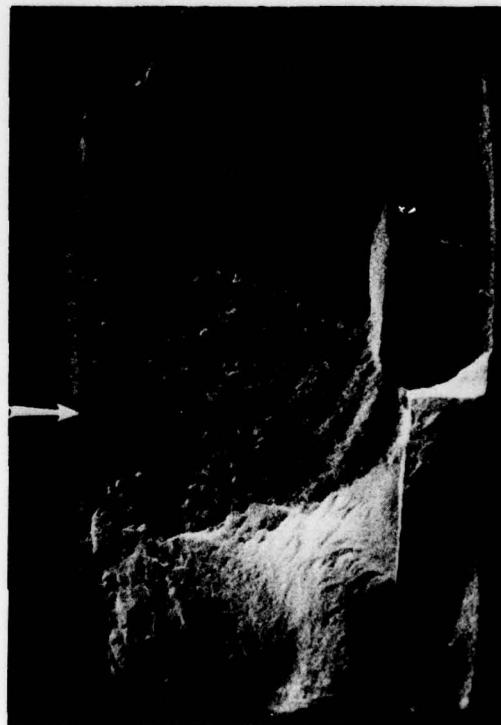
Fracture Surfaces of Ceralloy 147A HPSN Specimen No. 4, Showing Ultrasonically Detected Defect at Fracture Origin.
